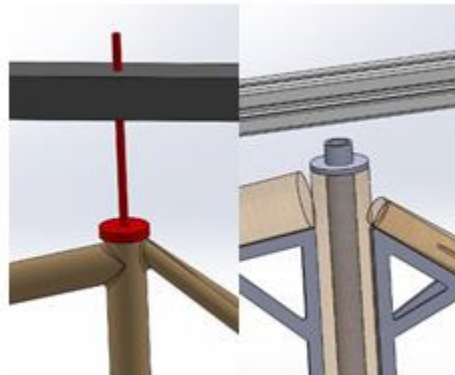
a)Jig with seat tube plug b)Jig without seat tube plug
